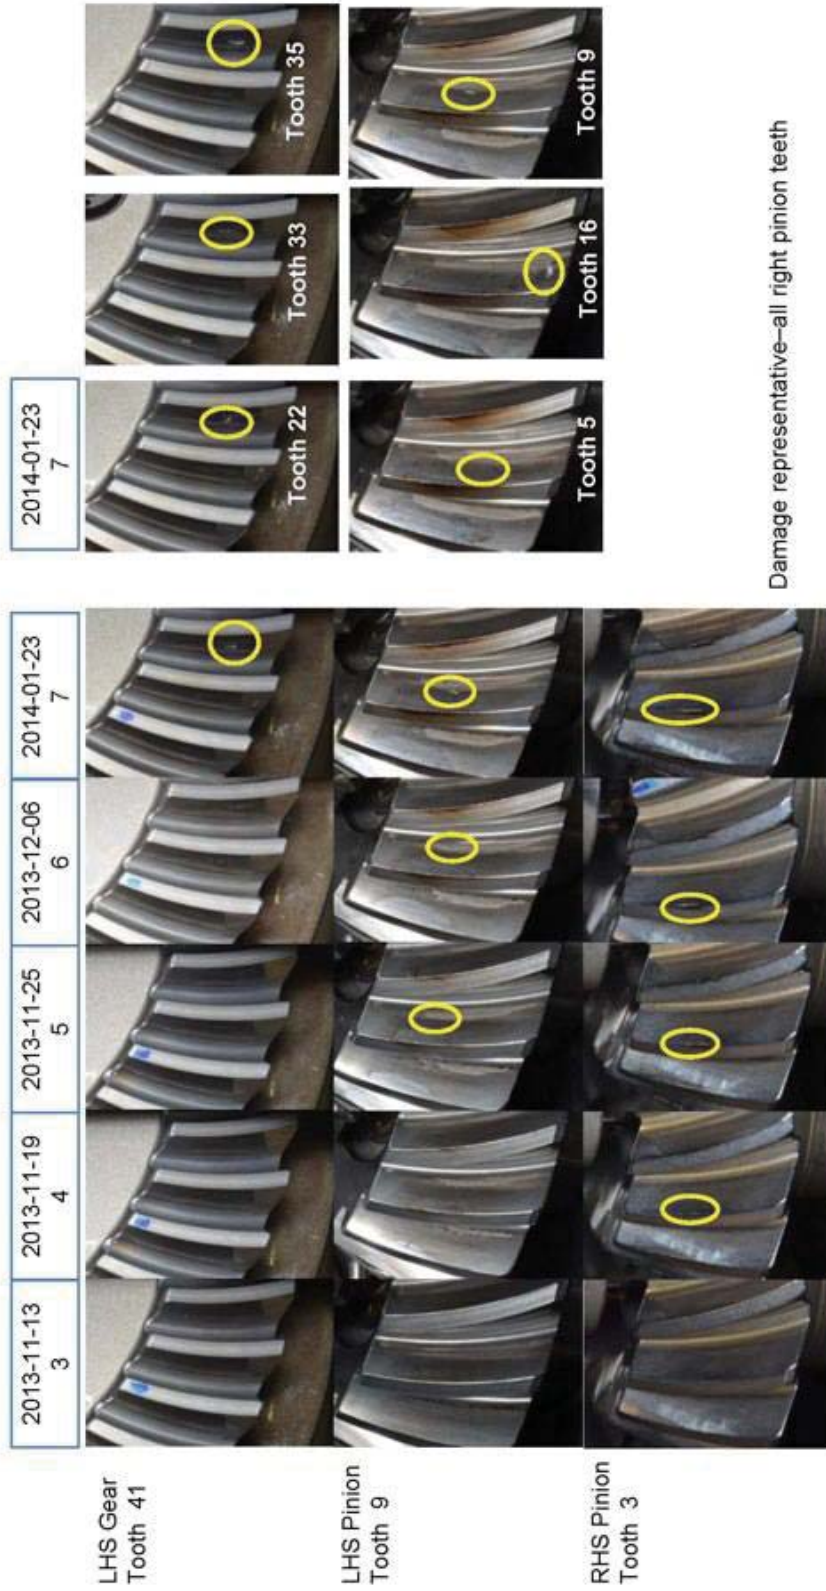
Test L1818R1616 pinion and gear damage modes.
